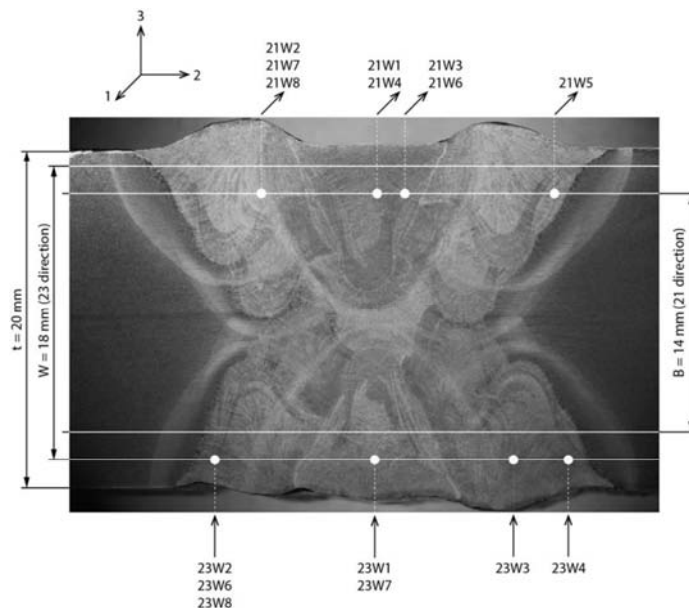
TPB specimen locations in the Weldox 960E / UNION X96 welded joints with the crack paths (21W and 23W)
